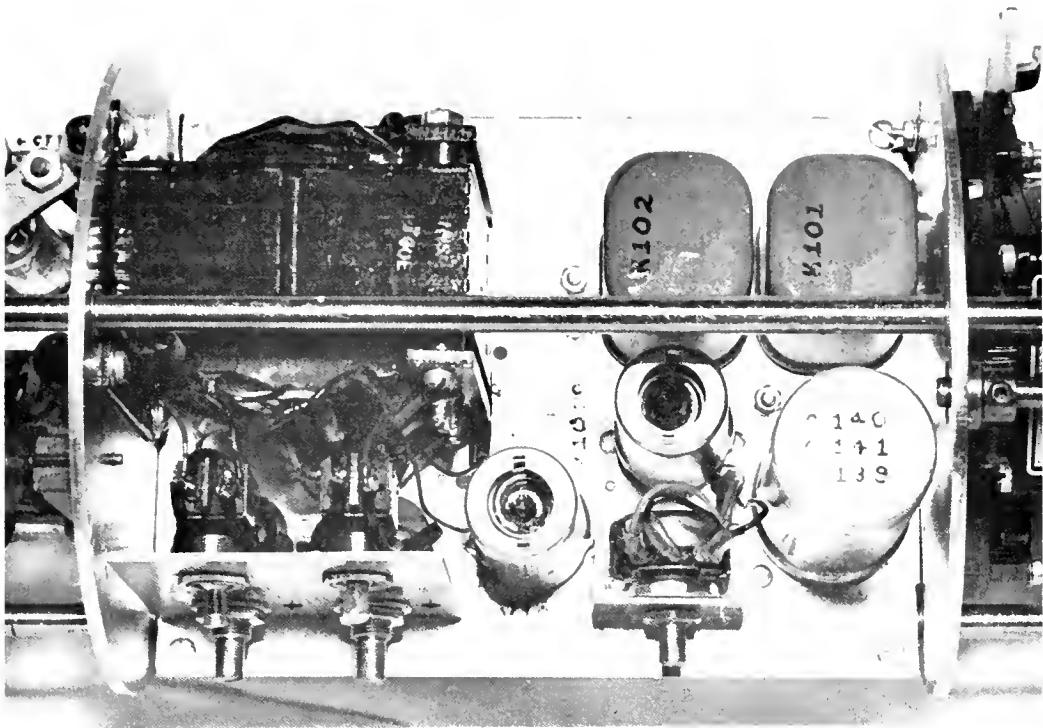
TELEVISION CAMERA DETAIL, SECTION D.
